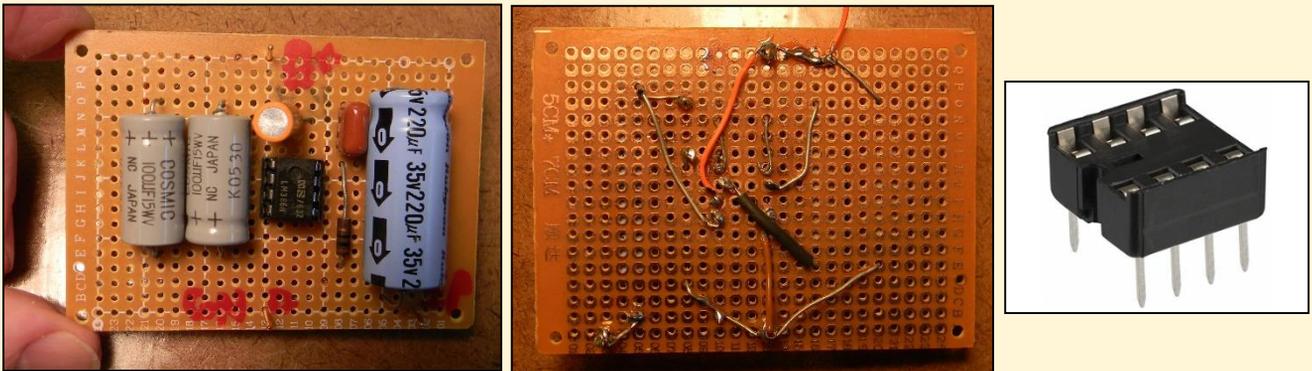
Audio amplifier circuit assembled on the top side of a small perfboard (*left*); components are soldered together in point-to-point fashion on the reverse side of the board (*center*). Placement isn't critical, but crossing wires must not touch; heat shrink wrap tubing is quite useful for this purpose. The LM386 IC is mounted in a socket (of the type shown at the right) whose 8 pins have the same spacing as perforations in the board. Use of a socket obviates the need to apply soldering heat directly to the pins of the IC itself and also enables quick chip replacement if ever needed.
